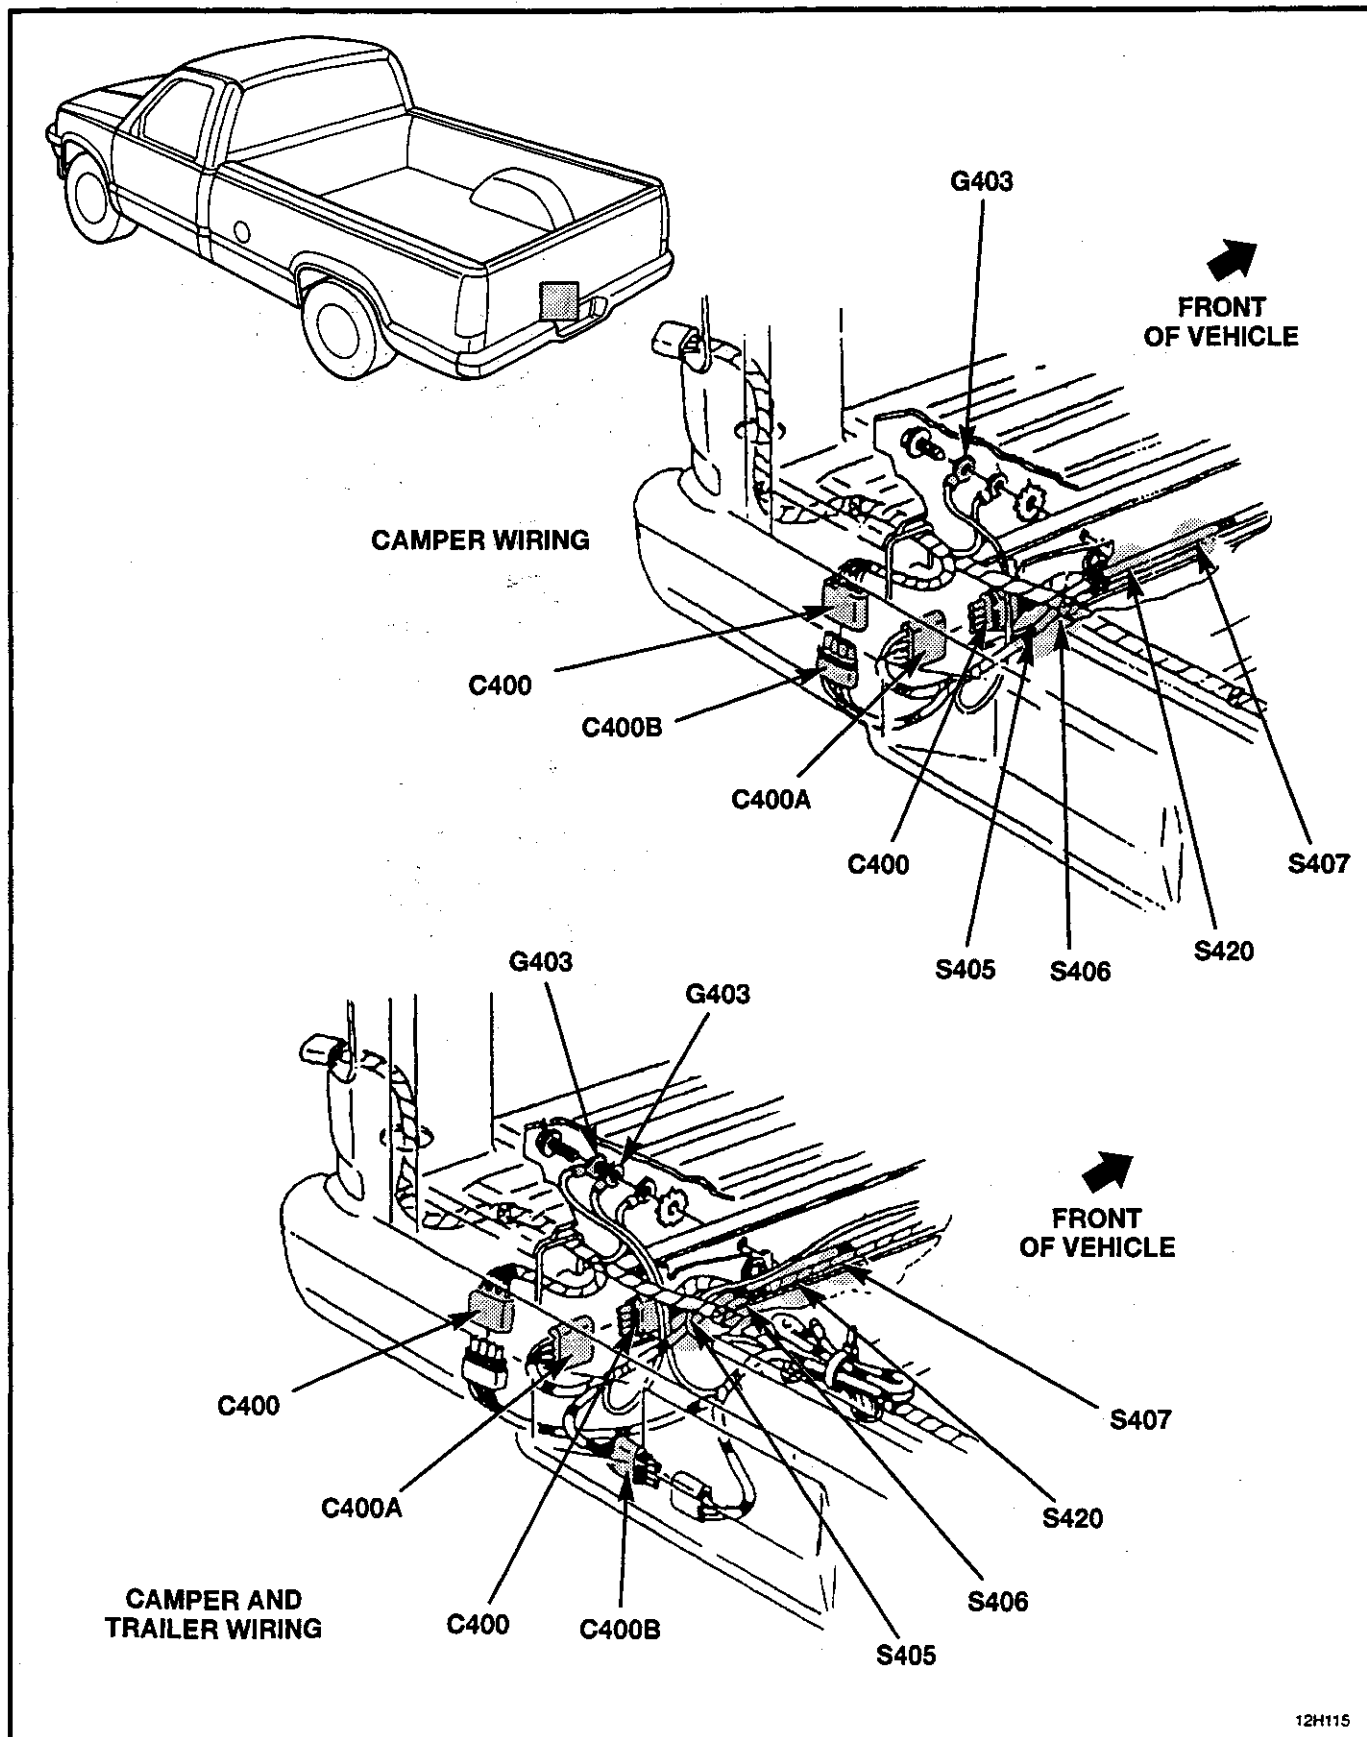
Heavy Duty Trailer and Camper Rear Lamp Wiring, 2 Door Pickup
